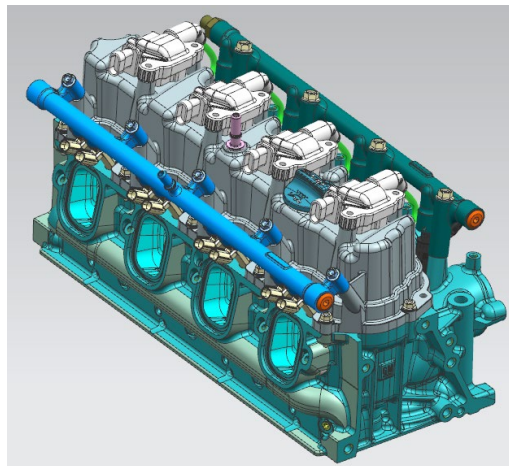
Proposed advanced combustion system cylinder head assembly – intake side view.
